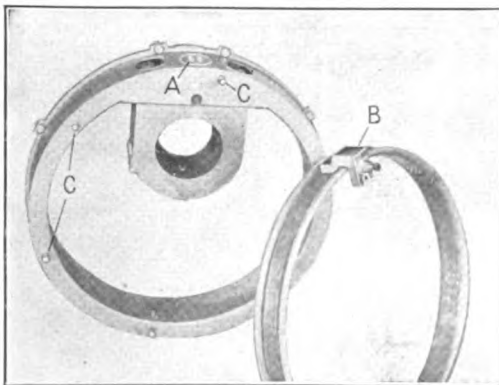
DIE AND FIXTURE FOR LUG RIVET HOLES IN RIM
